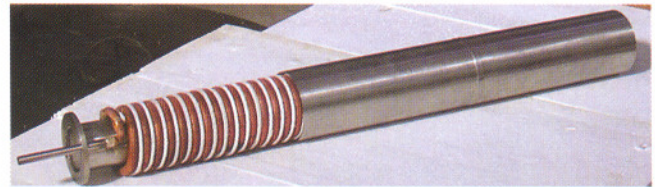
Photograph of heat exchanger HX-6 before final welding
